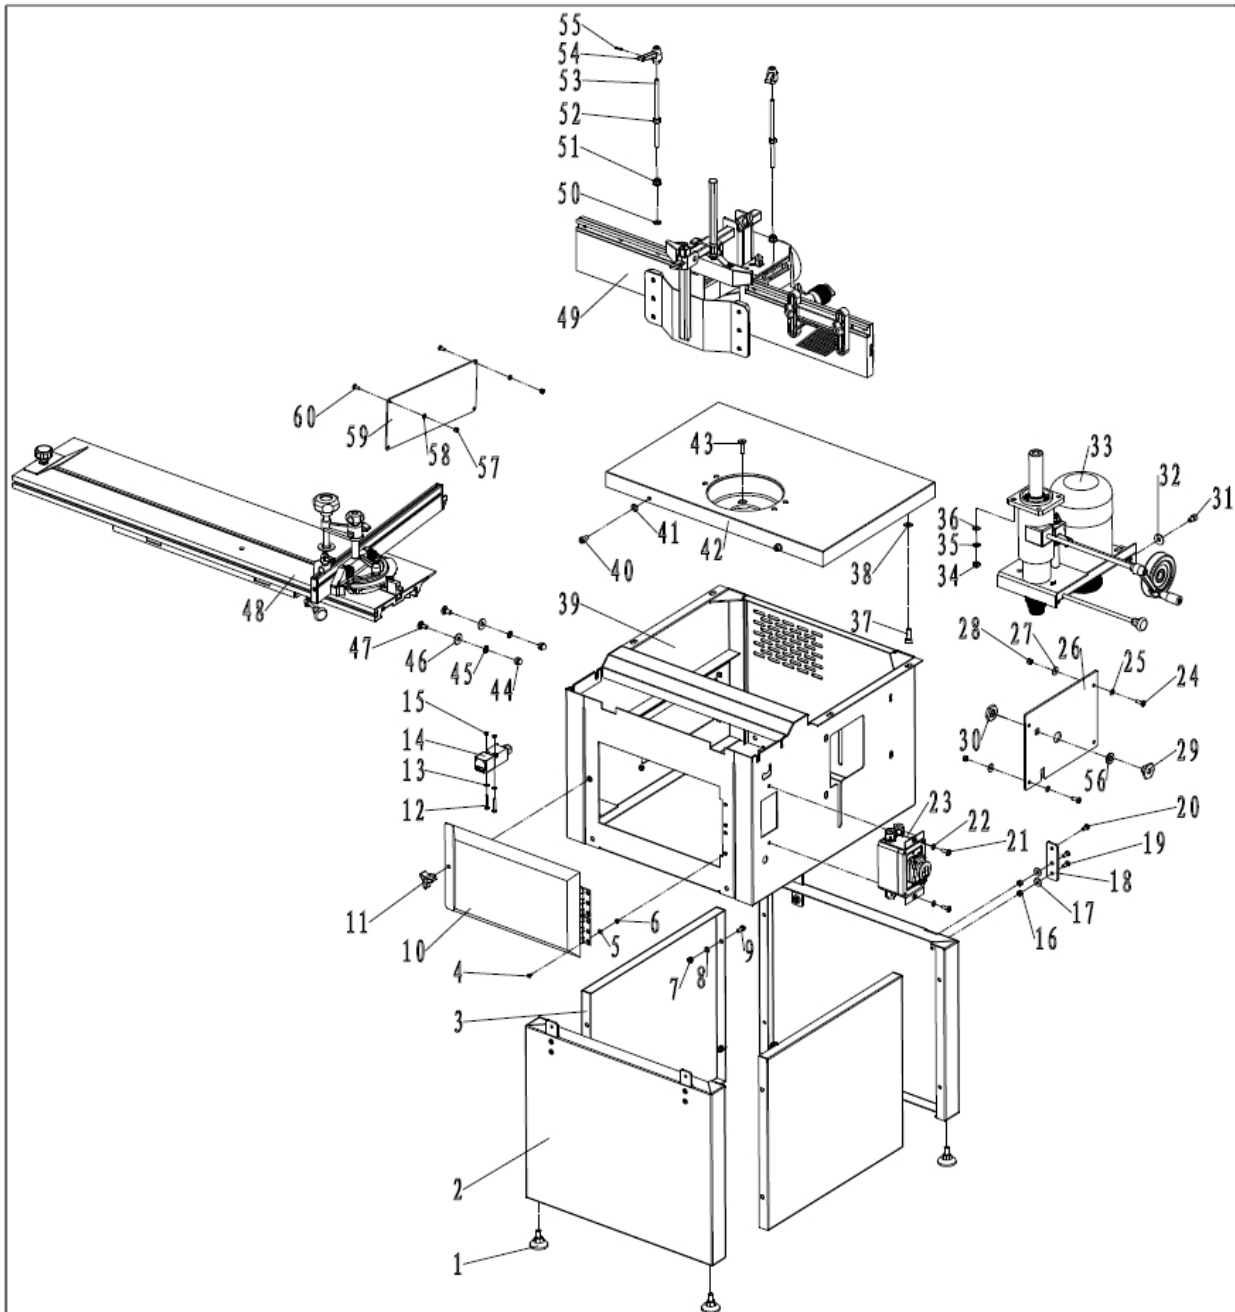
Spare parts drawing 1 - Spindle Moulder TF 170 E (230 V and 400 V)
